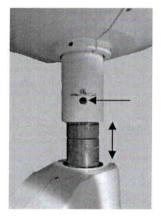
Incorrect: Mounting screw missing and/or lowered support arm
